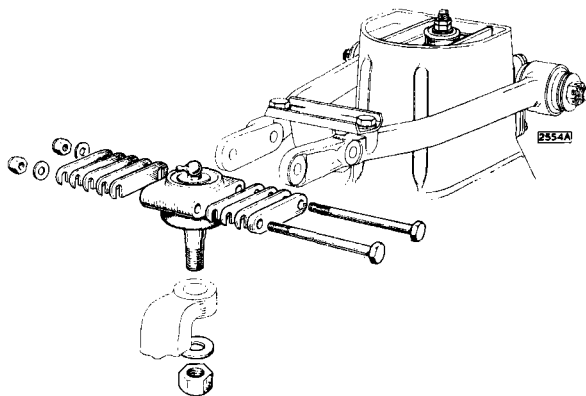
Removal of the Upper Wishbone Ball Joint.
